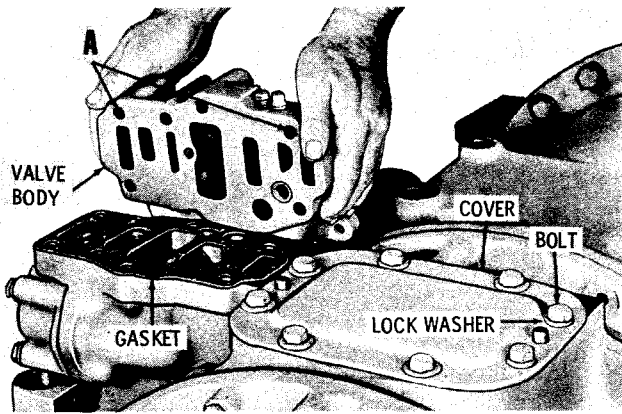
Installing main-pressure regulator valve body assembly (current models except VCLT, VCLBT)
